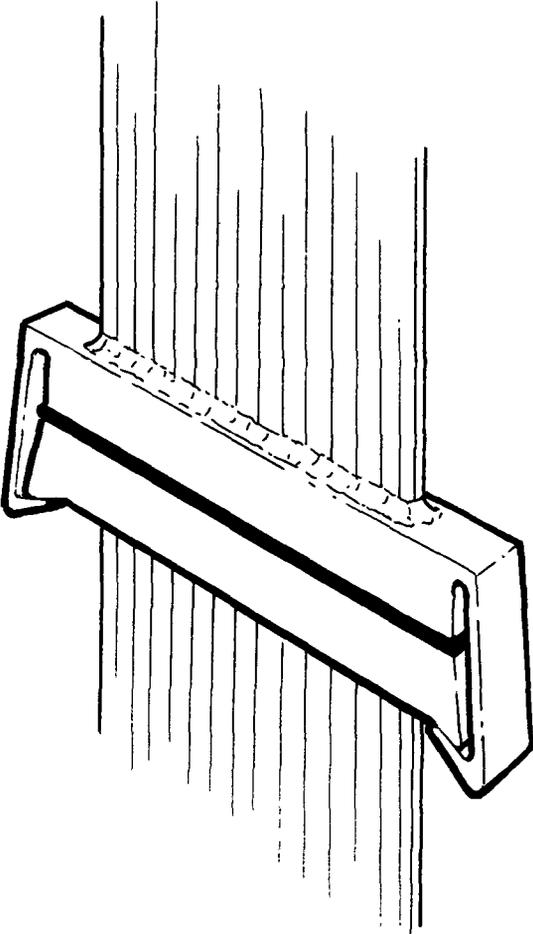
CONCEPT #3 WITH INTEGRALLY MOLDED CLAMPS
